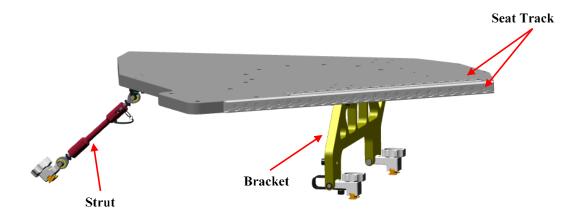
Toilet Mounting Adapter provides the mechanical interface for the Toilet to Node 3.
